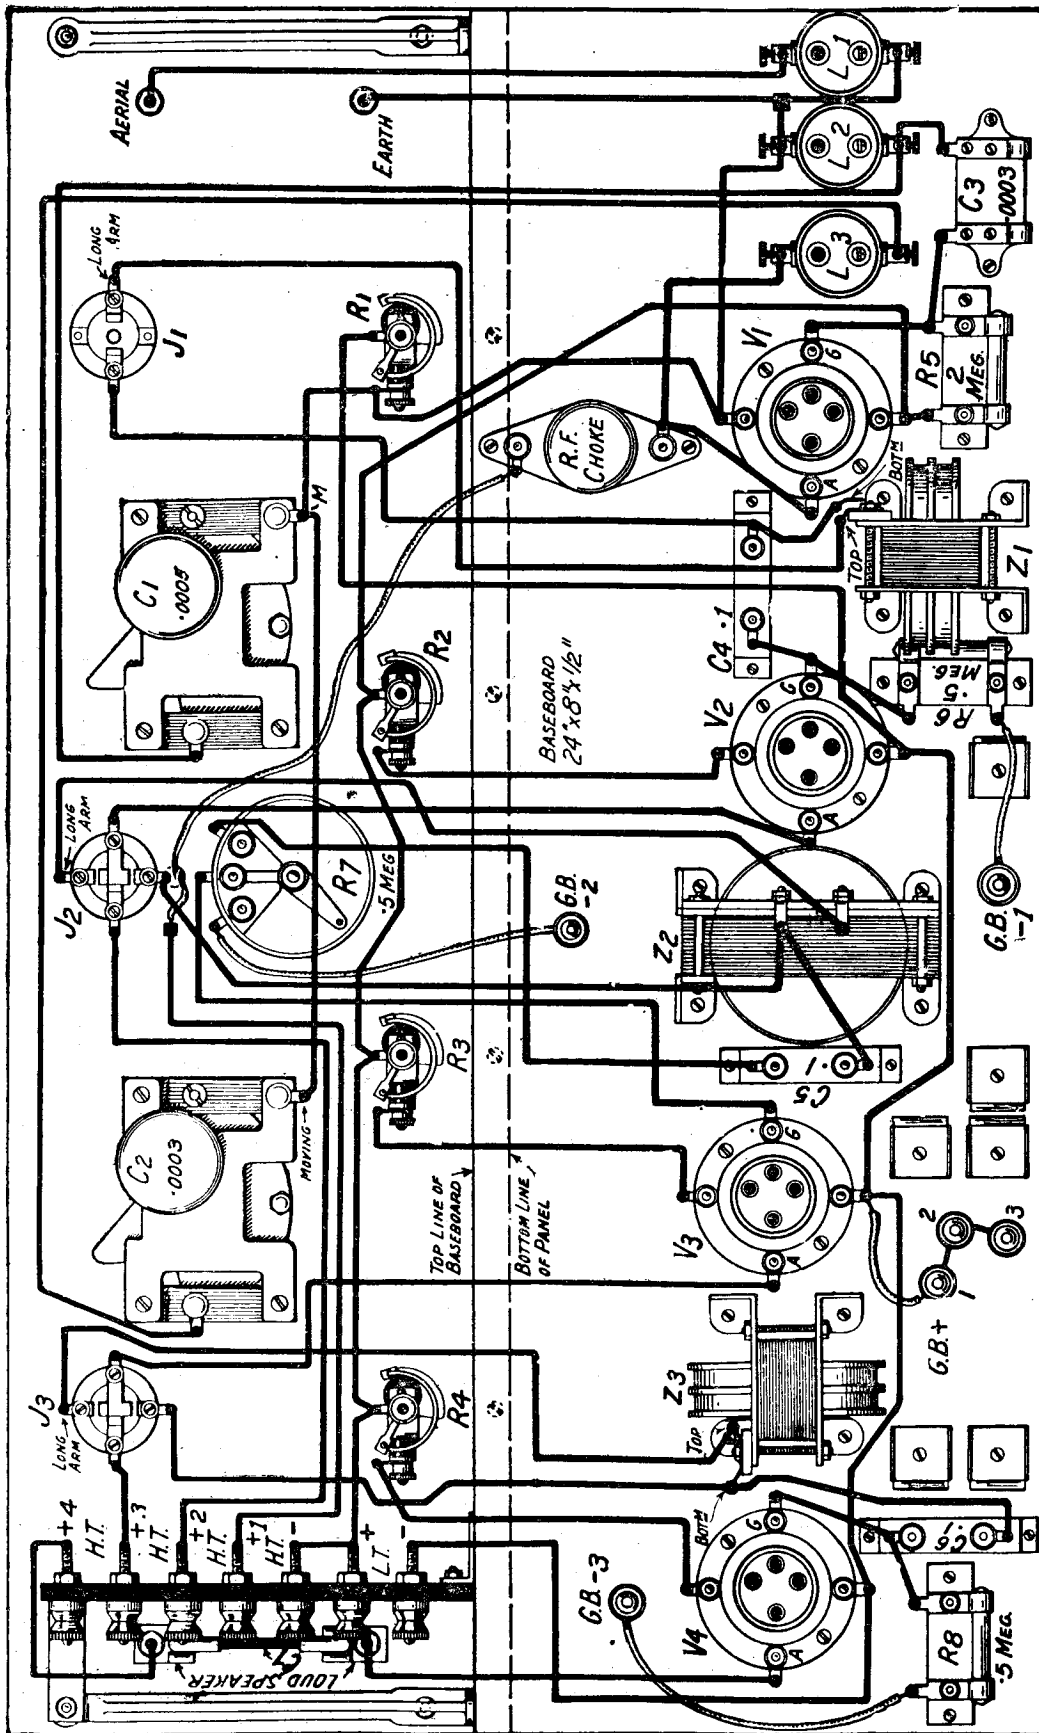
Note how the components have been arranged in order to ensure easy wiring, combined with adequate clearance. Constructors should ask for wiring Blue Print No. 166b (free).
